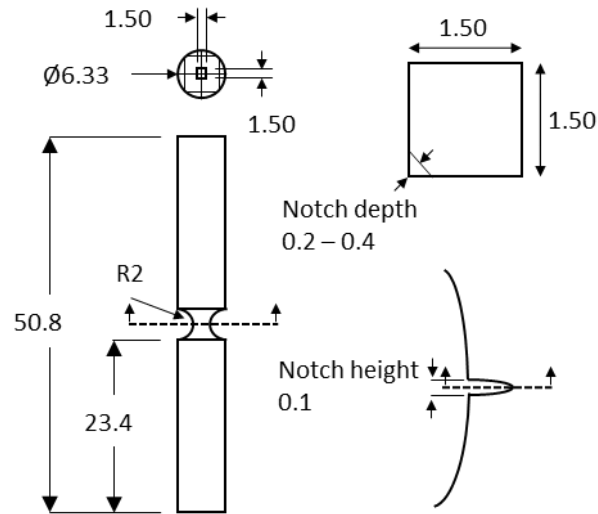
Diagram schematic of sample geometry in *mm*, gauge cross section and corner notch position and dimensions.
